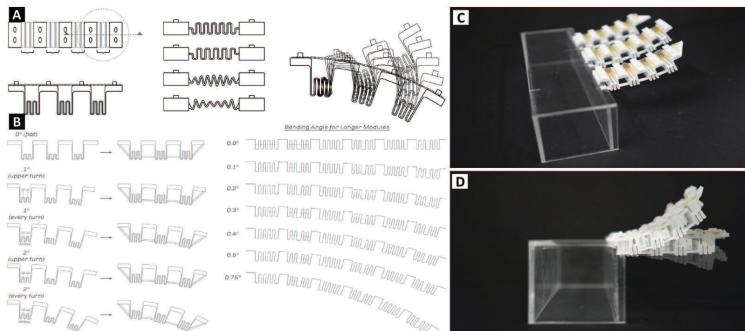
Feluxue design and testing (A) Springy flexure derivatives (B) Bend angles and pre-bending in compliant flexures; Testing of chosen compliant flexure (C) Isometric view of 3D printed flexure (D) Front view of the flexure during shape change.
